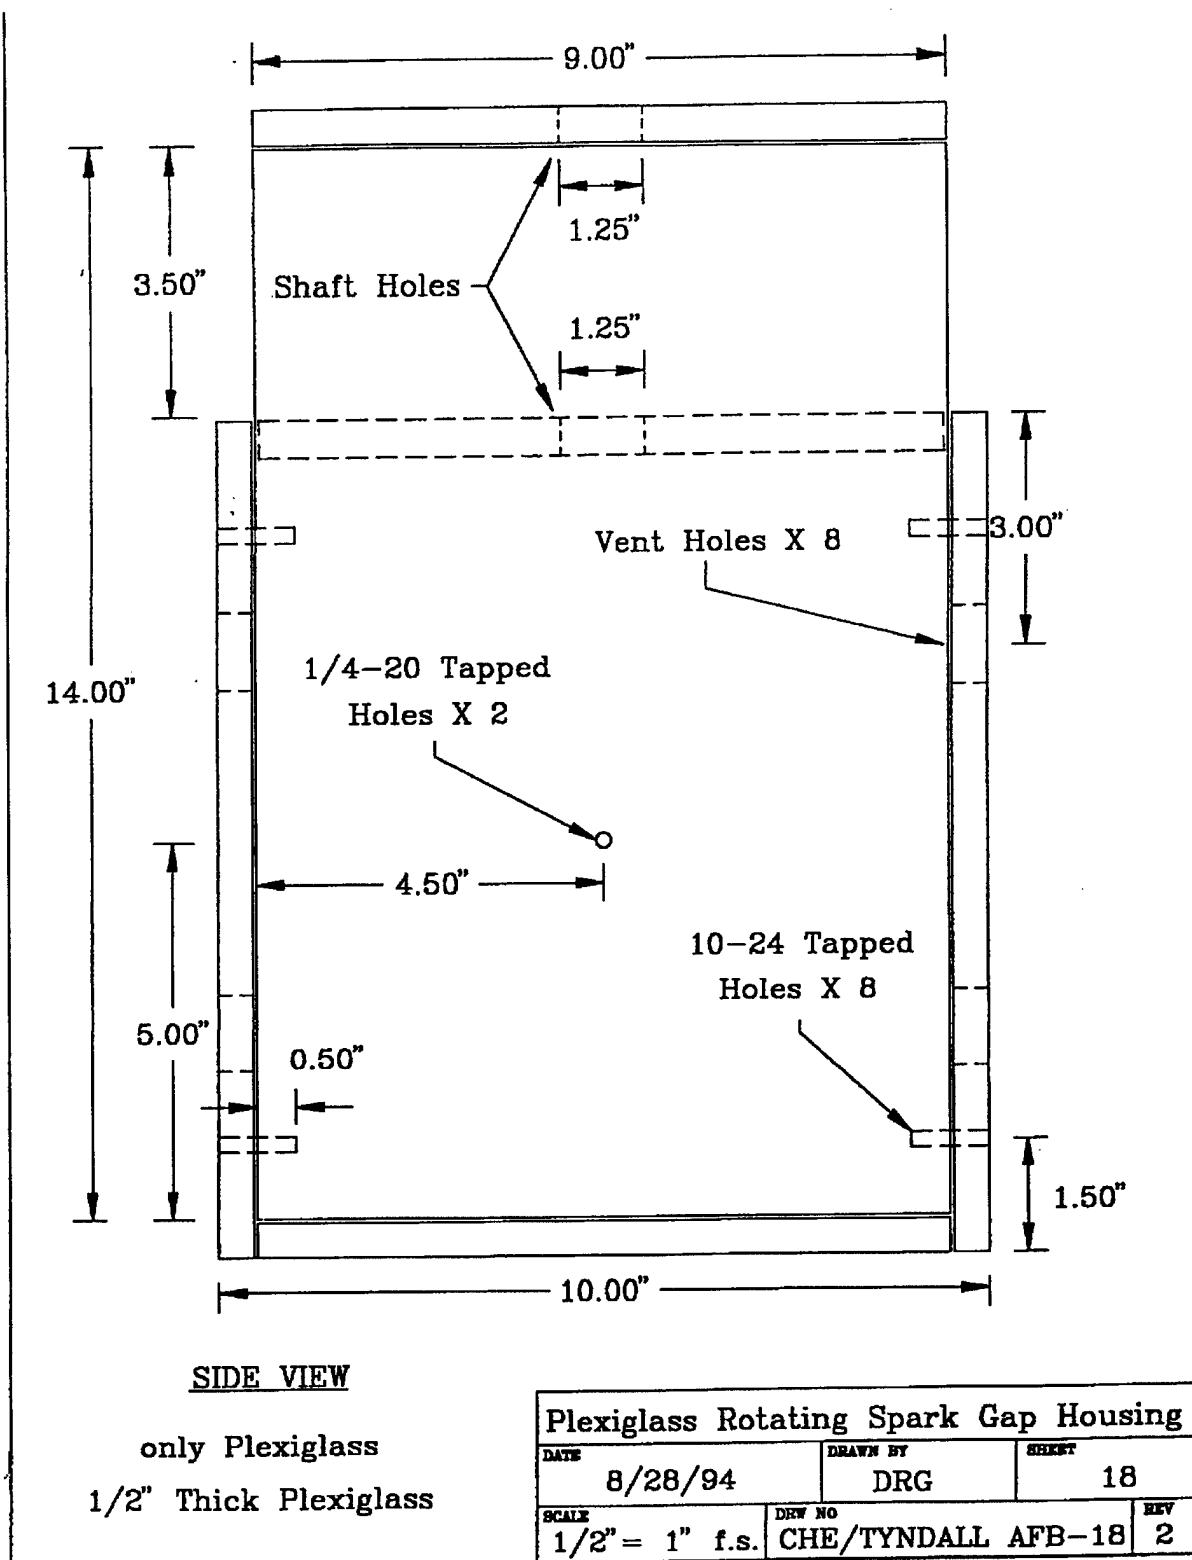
Plexiglas Rotating Spark Gap Housing - Side View (only Plexiglas)
